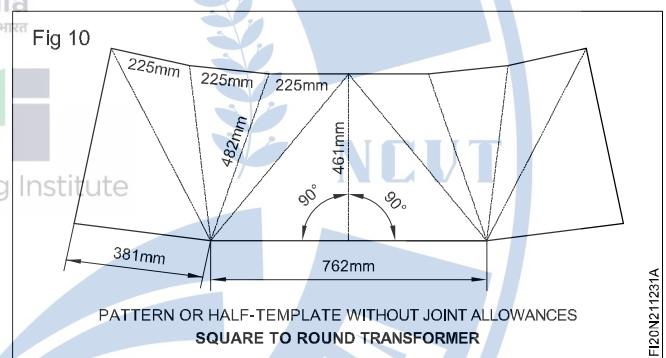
shows a scale development pattern on which are marked the full size dimensions. This type of drawings are supplied by the drawing office for marking out purposes. Allowances for the seams and the joints must be added to the layout.
